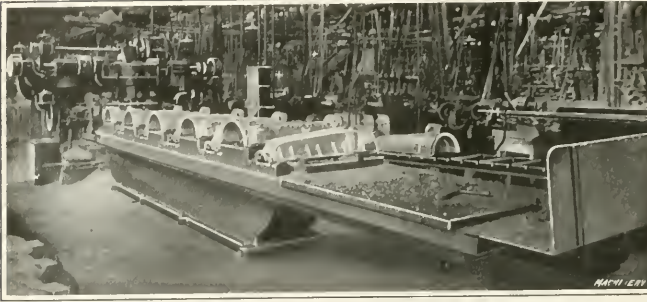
Same Type of Machine as that shown in Fig. 1, but equipped with Fixtures set transversely across Table
